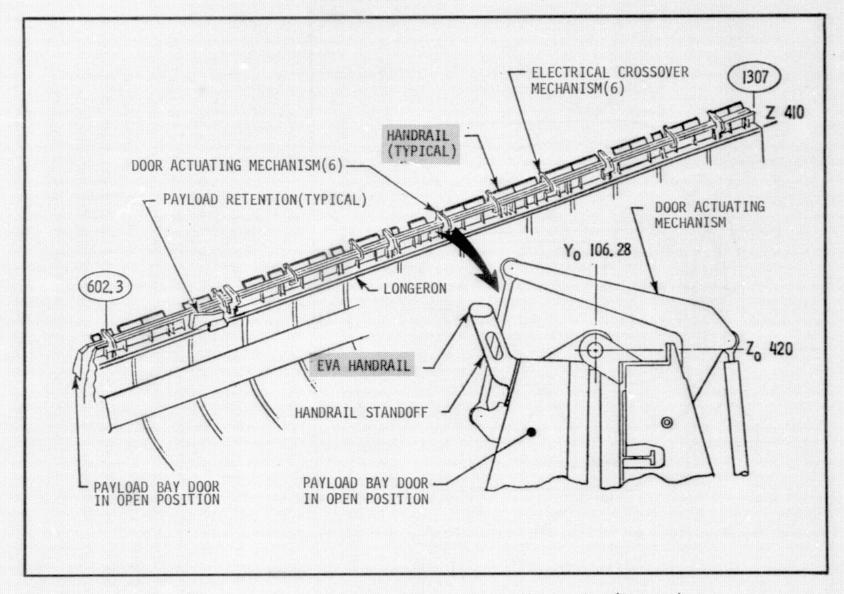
Shuttle Payload Bay Door Handrail Location (Concept)
